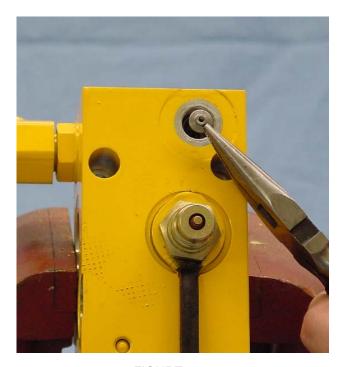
Reassemble Spring Guide smooth side down.
